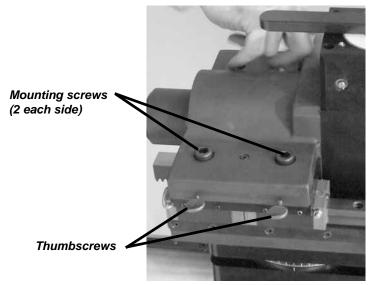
Install the bolts loosely, then snug the two thumbscrews to square the gearbox.
